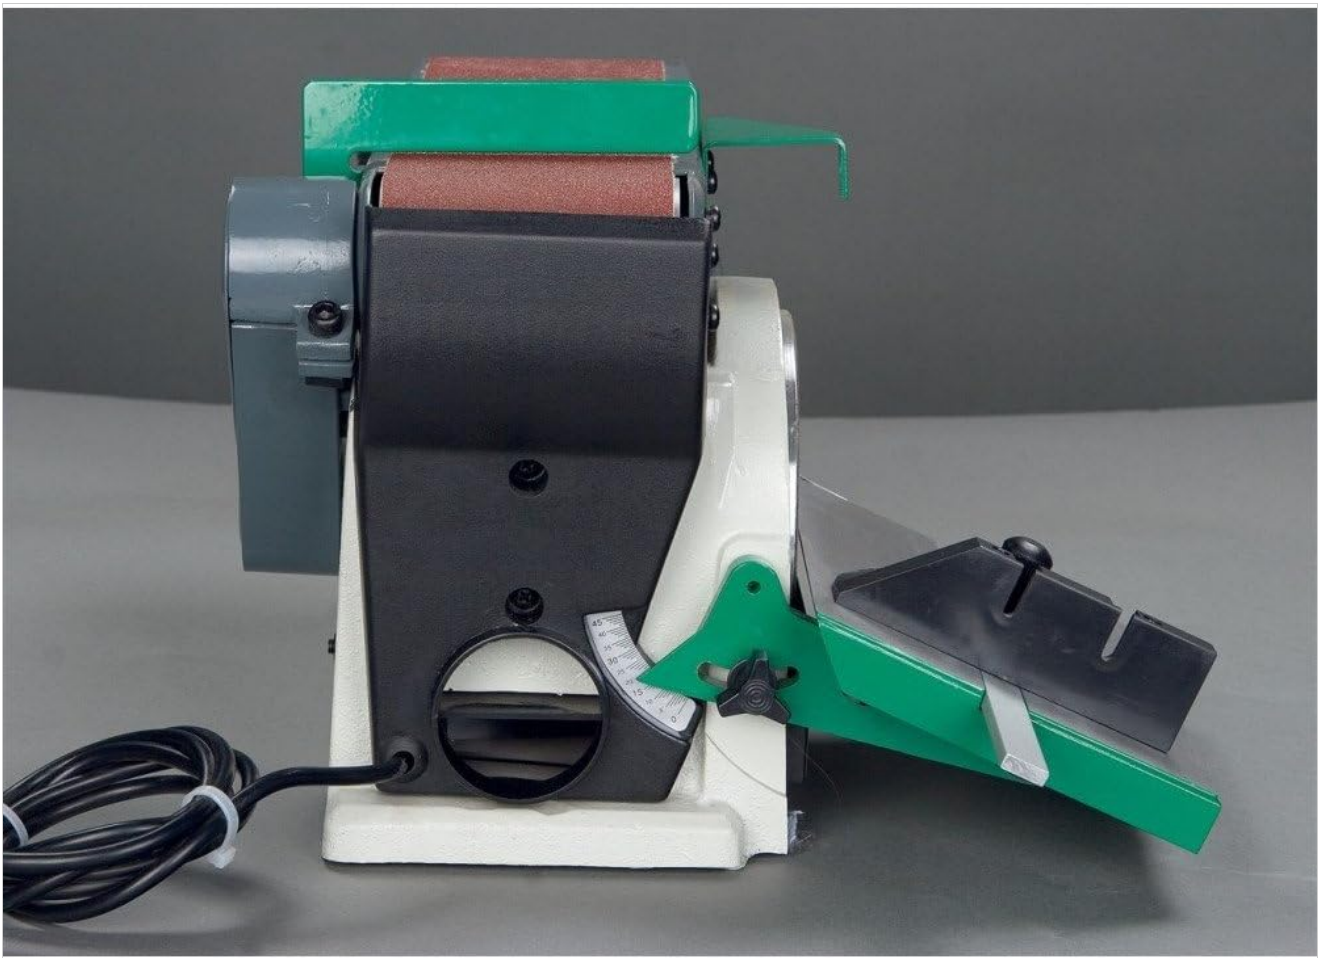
Side view of the sander, highlighting the angle adjustment mechanism for the work table and belt assembly.
